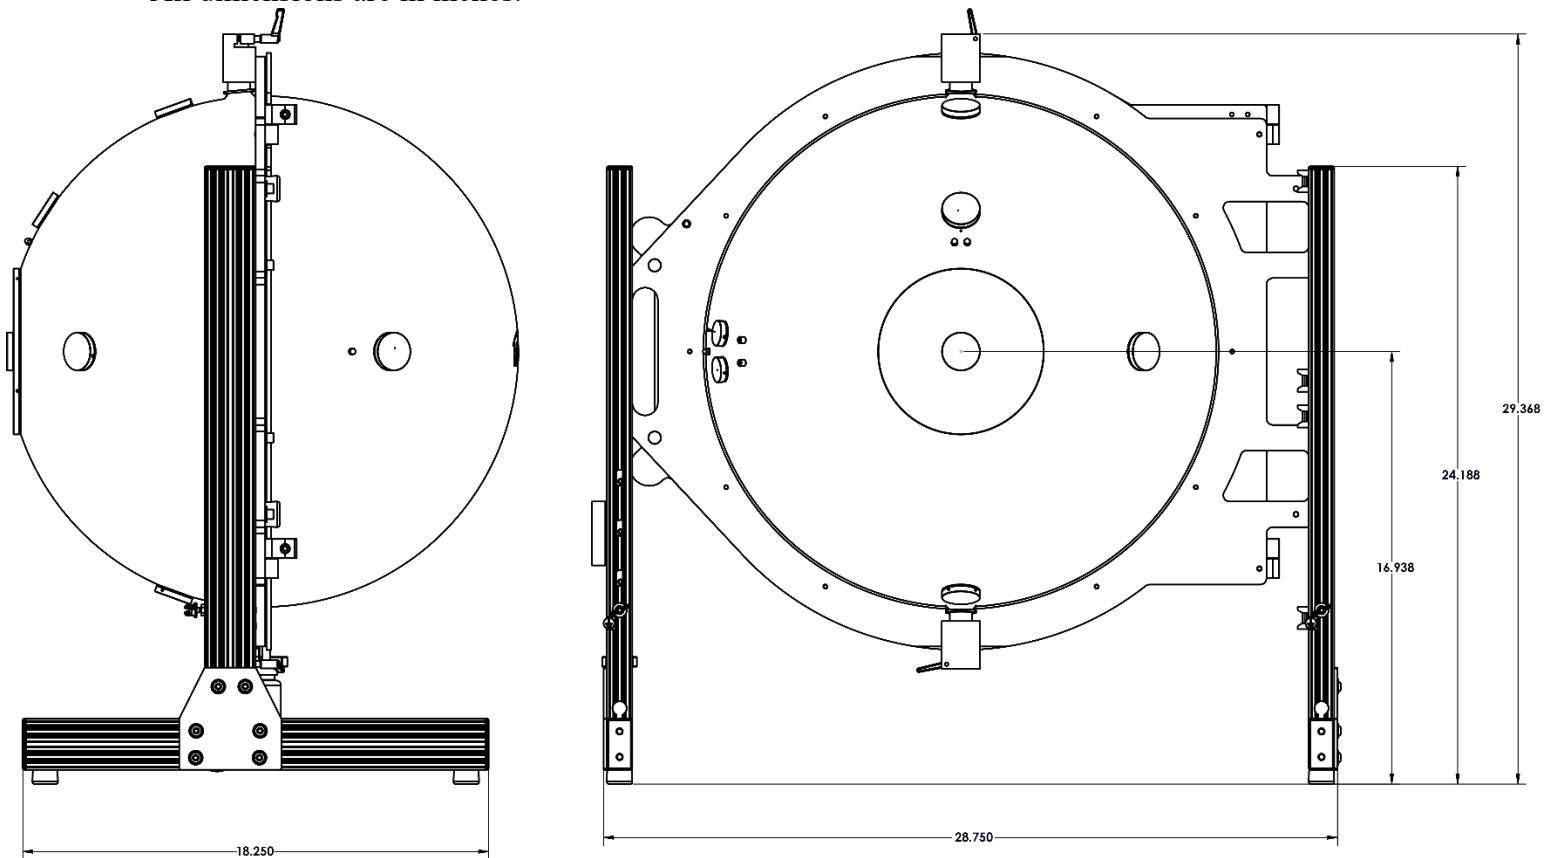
LMS-050 50cm Sphere Assembly Dimensions (inches)
